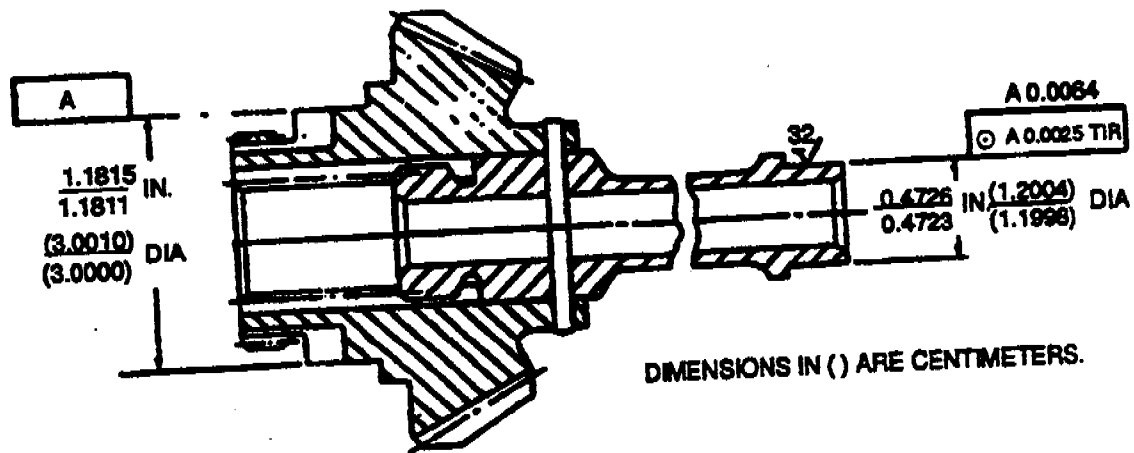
Accessory Drive Gearshaft Repair Area.
